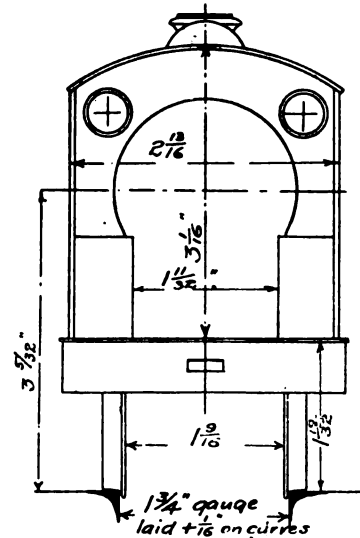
REAR END VIEW, $1\frac{1}{2}$ -IN. N.E.R. LOCOMOTIVE.
